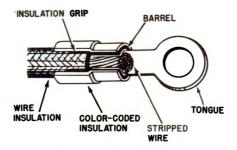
Preinsulated terminal lug: cutaway drawing.
